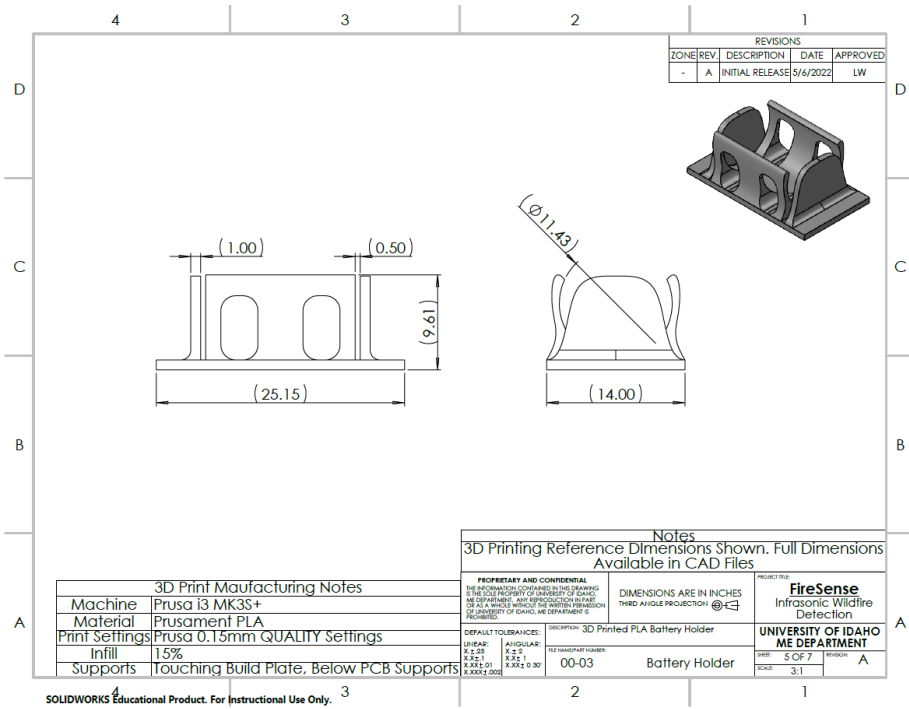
Technical Drawing Package Sheet 5, Battery Holder
